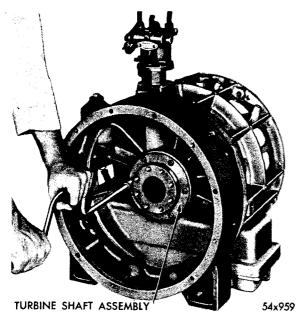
Removing or Installing Turbine Shaft Assembly to Converter Housing
